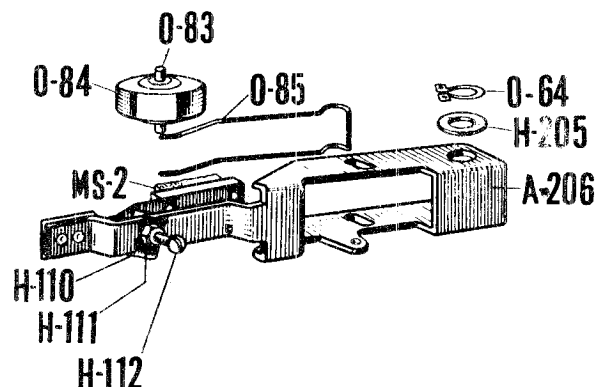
PRESSURE WHEEL ASSEMBLY
